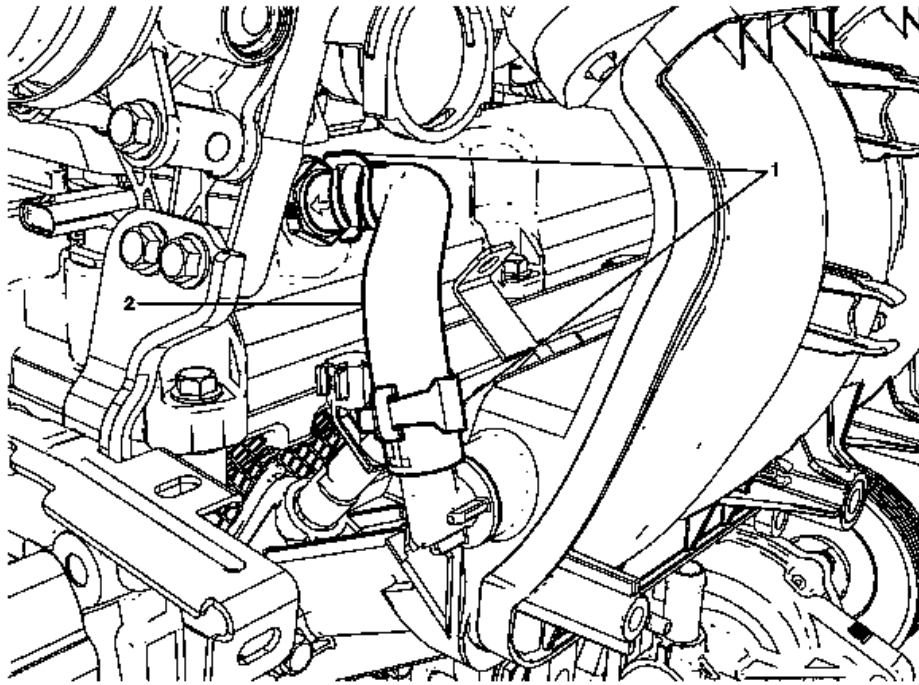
Positive Crankcase Ventilation Hose/Pipe/Tube (LFM)
